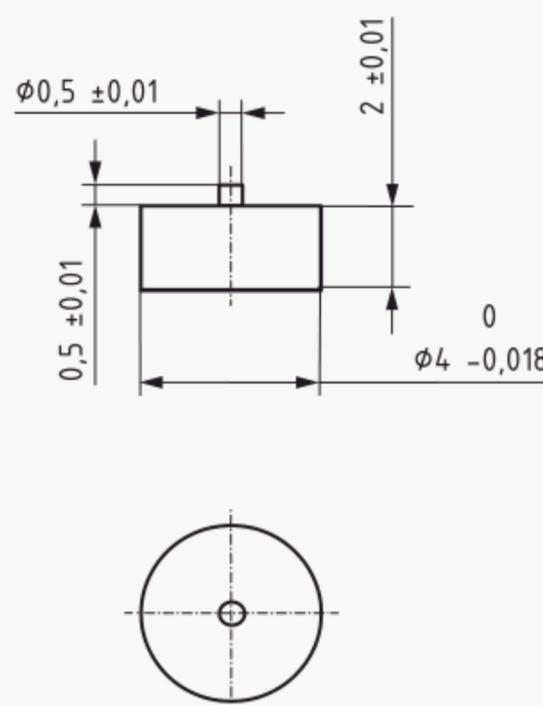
Cap used for the production of test-pieces used for the measurement of dimensional change during hardening
